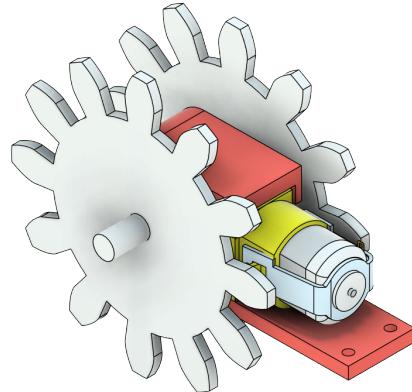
Assembled conveyor belt power unit, no additional fasteners required.
